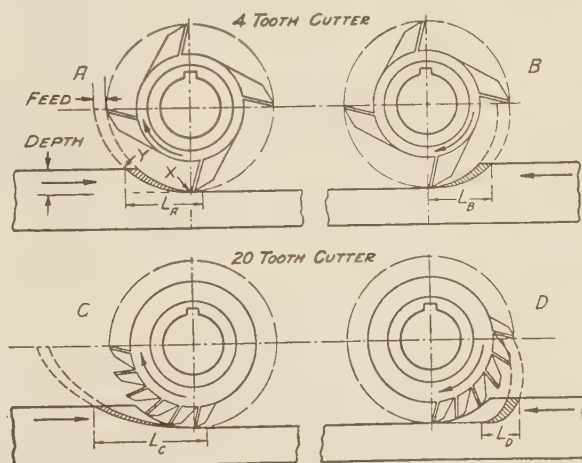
GRAPHICAL ANALYSIS OF CHIP FORMATION WHEN MILLING UP AND MILLING DOWN WITH COARSE- AND FINE-TOOTH CUTTERS (With thick chips removed more efficiently, from a power standpoint, than thin chips, it is seen that the 4-tooth cutter is more efficient when cutting down at B than when cutting up. It is seen, also, that the fine-tooth cutter is more efficient when cutting down at D than when cutting up. Further, it is seen that the fine-tooth cutter when cutting down is more efficient than the coarse-tooth cutter when cutting down, the feed per tooth in all cases being the same.)
